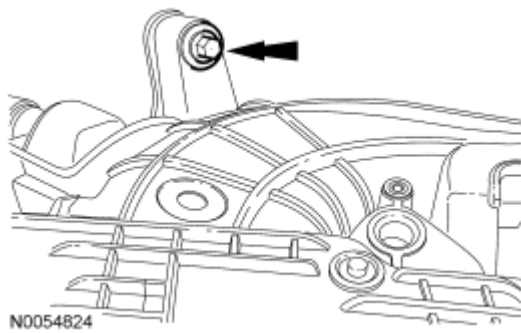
Locating Upper Intake Manifold Support Bracket Bolt
